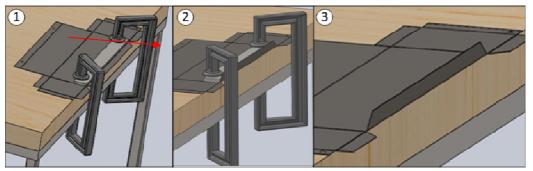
Bend #1- (1) Clamp Bending Bar down using Bar Clamps. (2) Bend flange up along 12" Bending Bar. (3) Finished work piece after Bend #1 is completed.
